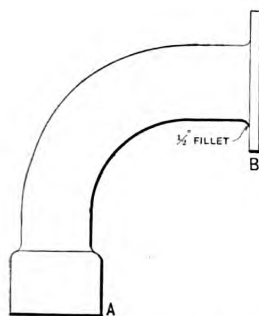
Elevation of Quarter Bend Iron Pipe.
